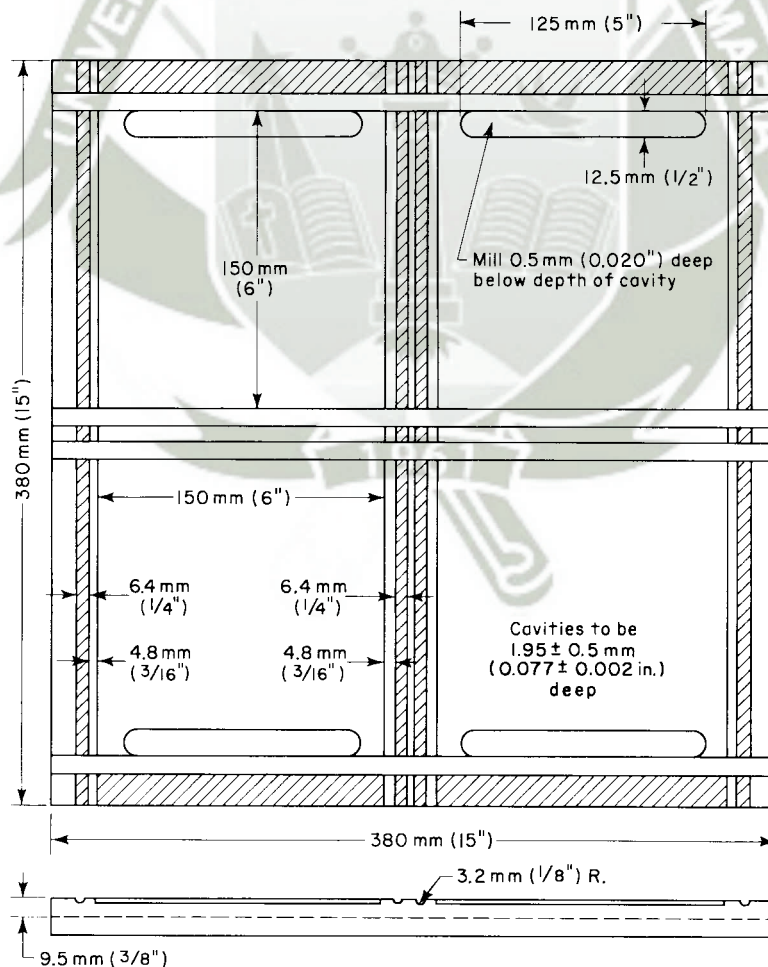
Cutoff Bar Type of Test of Slab Mold
